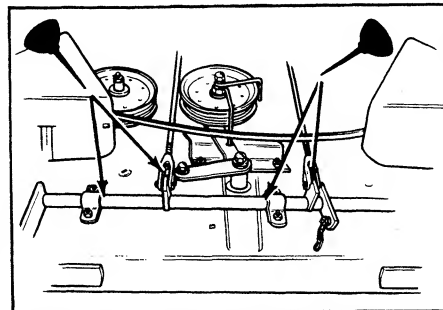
Lubricate Clevises & Two Points Where Roller Bar Contacts Bracket.
